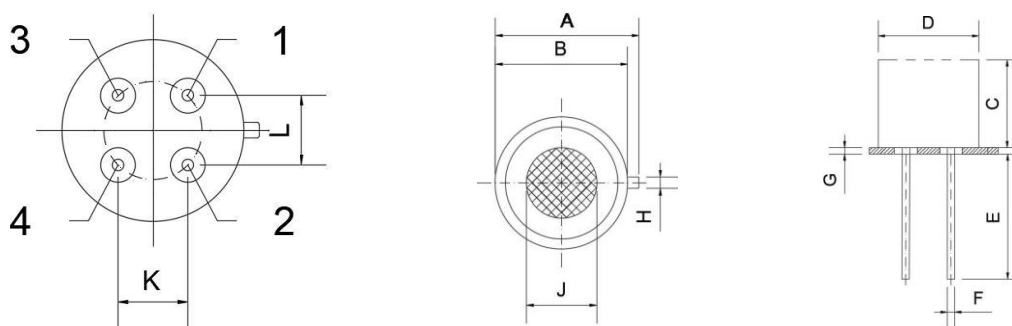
Mechanical dimension in mm and tolerance - ±0.1mm
